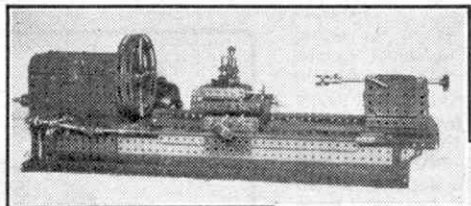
A well-constructed lathe built from Meccano parts. A close-up view of the sliding carriage is seen in Fig. 2, on the right.
